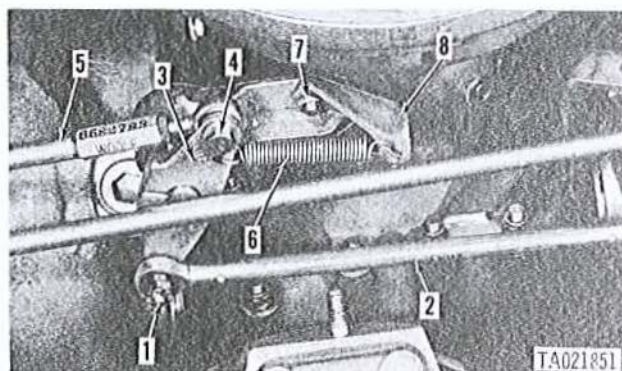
Removing or installing fuel shut-off rod, model AVDS-1790-2DR engine.
